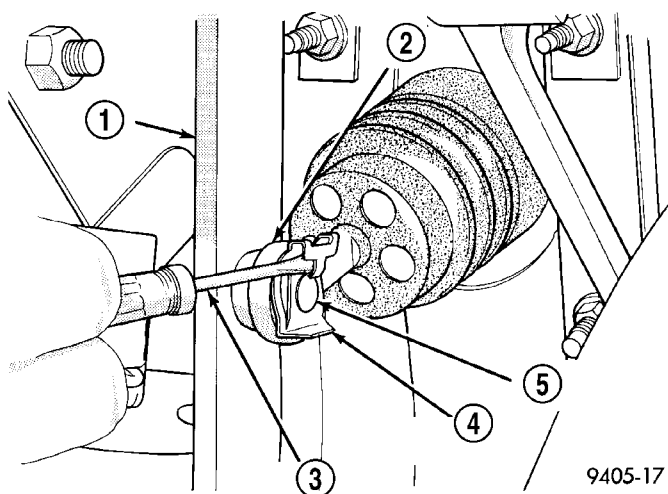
Input Rod Brake Pedal Retaining Clip Removal
